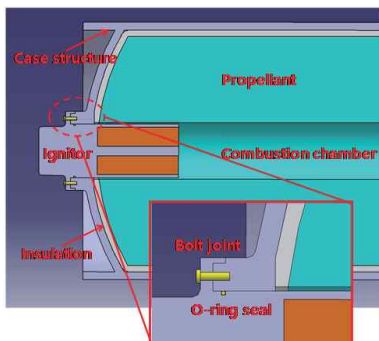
Schematics of rocket motor including bolted joint and o-ring seal
